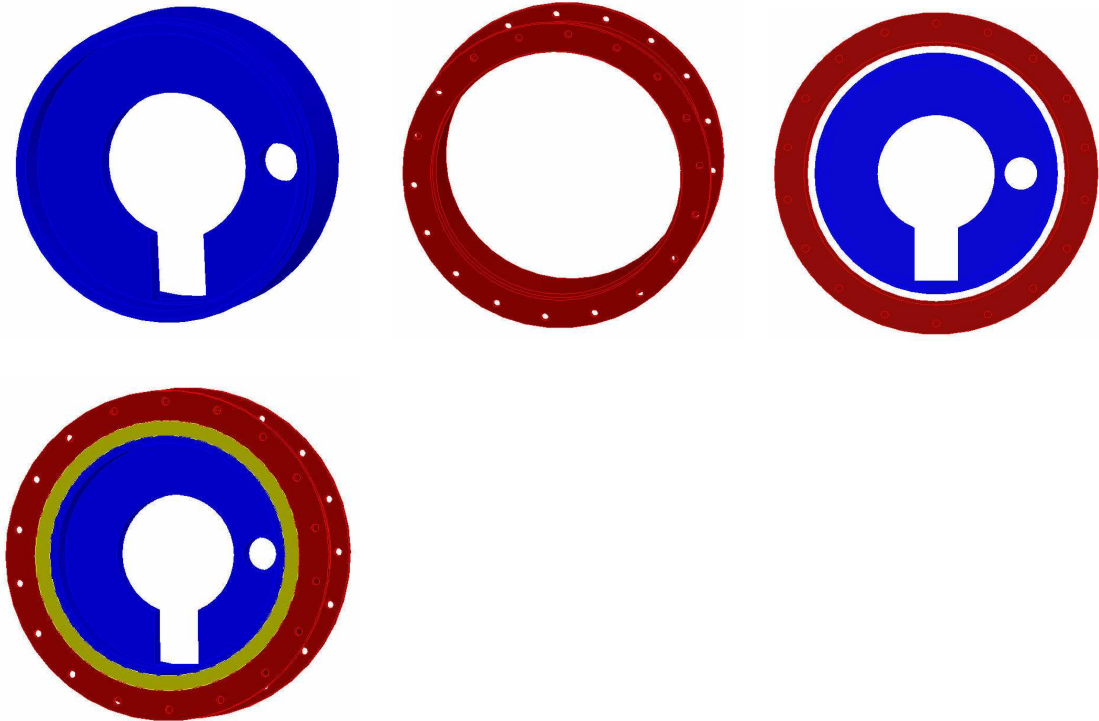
Assembly of the Inner Hub, Outer Hub, and Ball-Race Bearings
